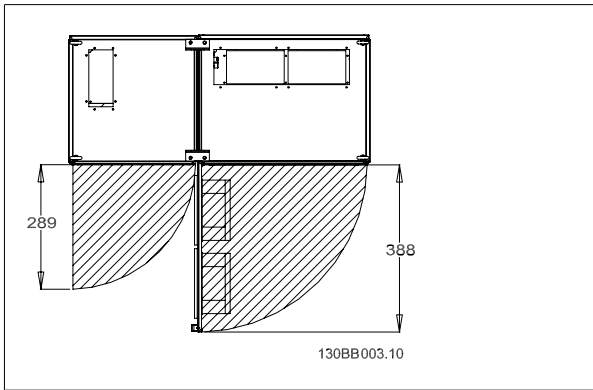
Space in front of IP21/IP54 enclosure type, frame size F1.
